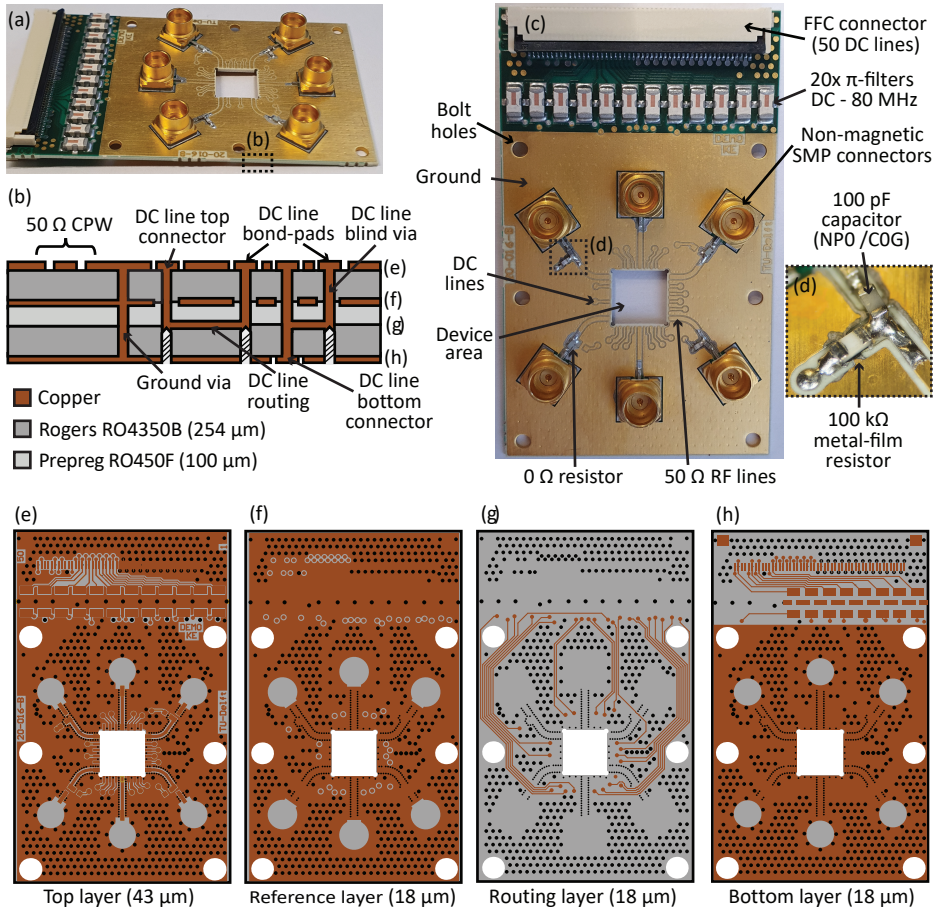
Printed circuit board (PCB) design. (a) Photograph of the hybrid PCB from an angle. The cross-section is enlarged in (b). (b) Diagram of the PCB cross-section (not to scale) showing four copper layers separated by three insulating layers. Through-hole vias connect all four copper layers together. Blind vias connect only the three topmost layers. Not shown is the gold-plating layer which covers all exposed metallic surfaces. (c) Top view of the PCB showing the different components assembled on the top layer. (d) Enlargement of the bias tee, composed of a resistor and a capacitor. (e-h) Diagrams of each of the four layers.
